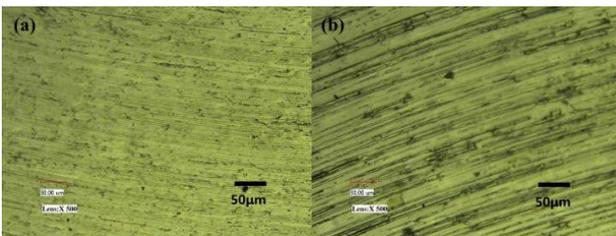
Morphologies of the workpieces after grinding with electrochemical modification (a) and without modification (b).
